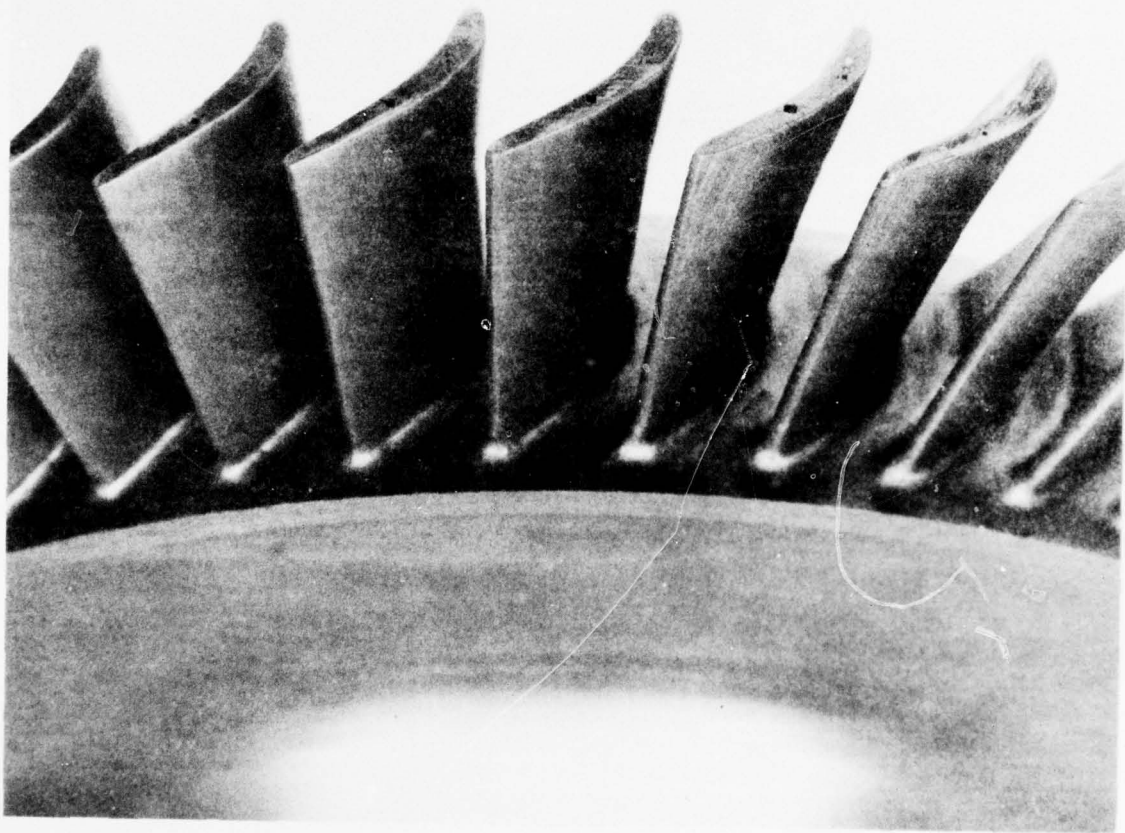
Close-up of the Blade Tips on the Finish-Machined Laminated Turbine Wheel.
